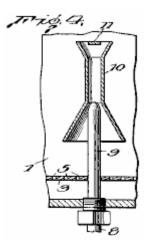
is a detail cross-sectional view showing the means for controlling the passage of gasses from the vapour expanding chamber into the intake manifold of the engine.
